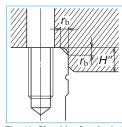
Shoulder for the Fig. 10 Shoulder for the ball slide datum surface
